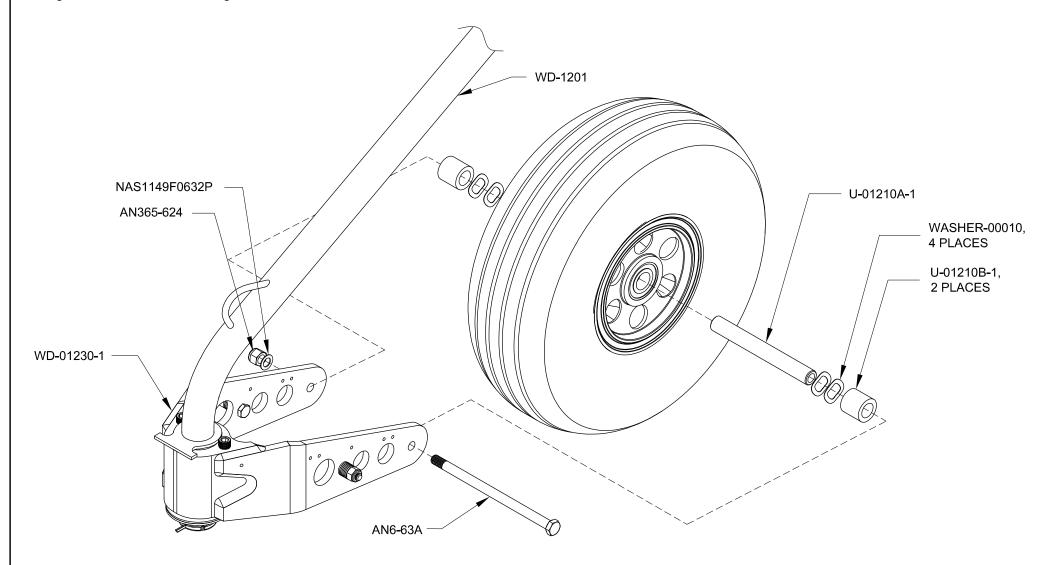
INSTALLING THE NOSE WHEEL AND TIRE ASSEMBLY
